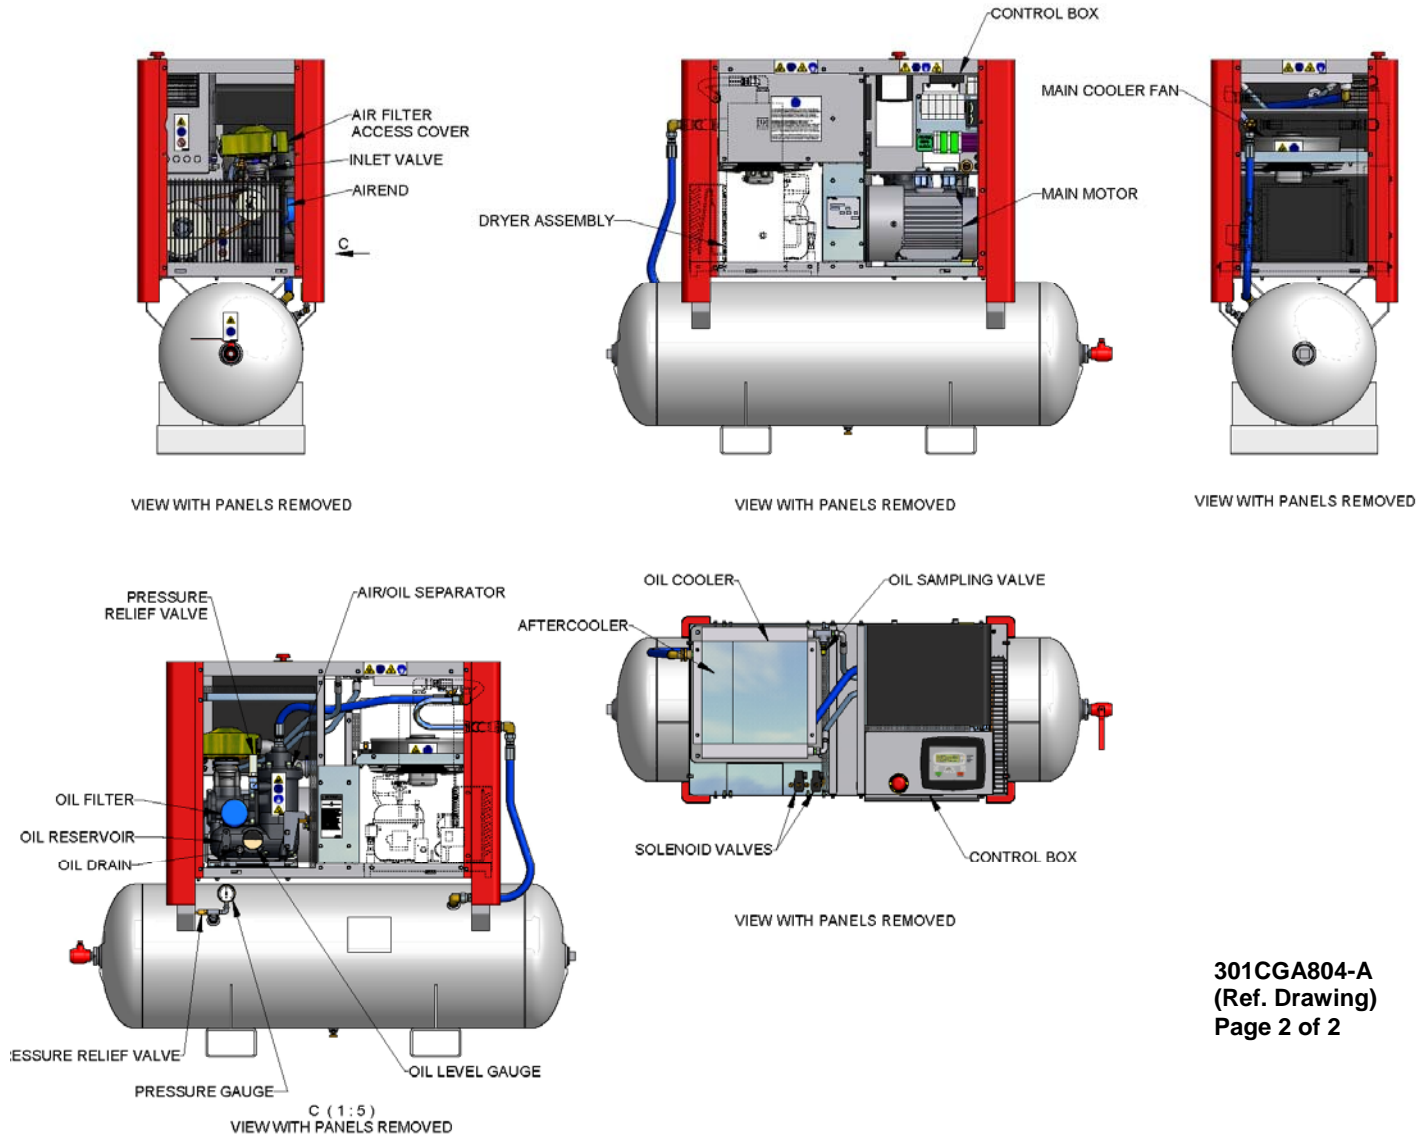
PACKAGE OUTLINE (AIR-COOLED) - TANK MOUNTED
